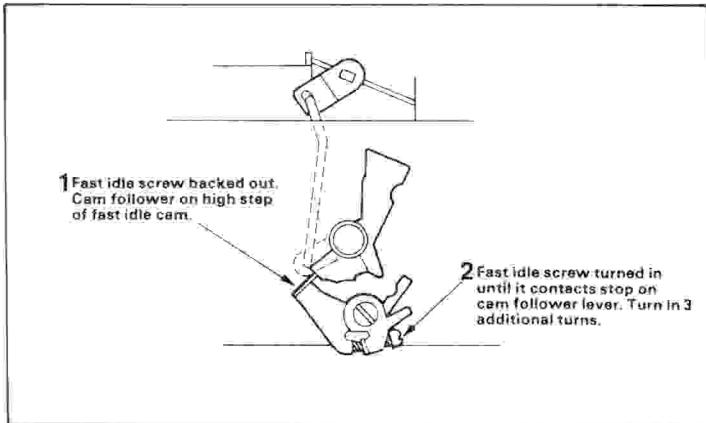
FAST IDLE SETTING (Off Engine)
